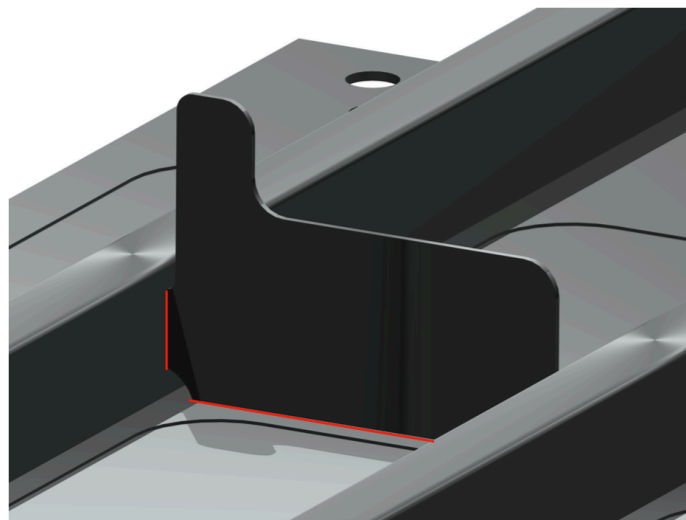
Concept clip design for welded clip-skin joint (50, p. 132)
